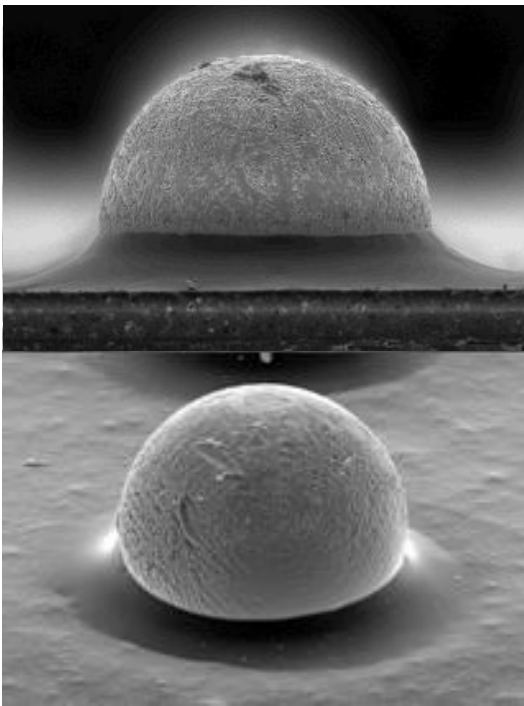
(b) SEM image of ball bumps using solder joint encapsulant adhesive
